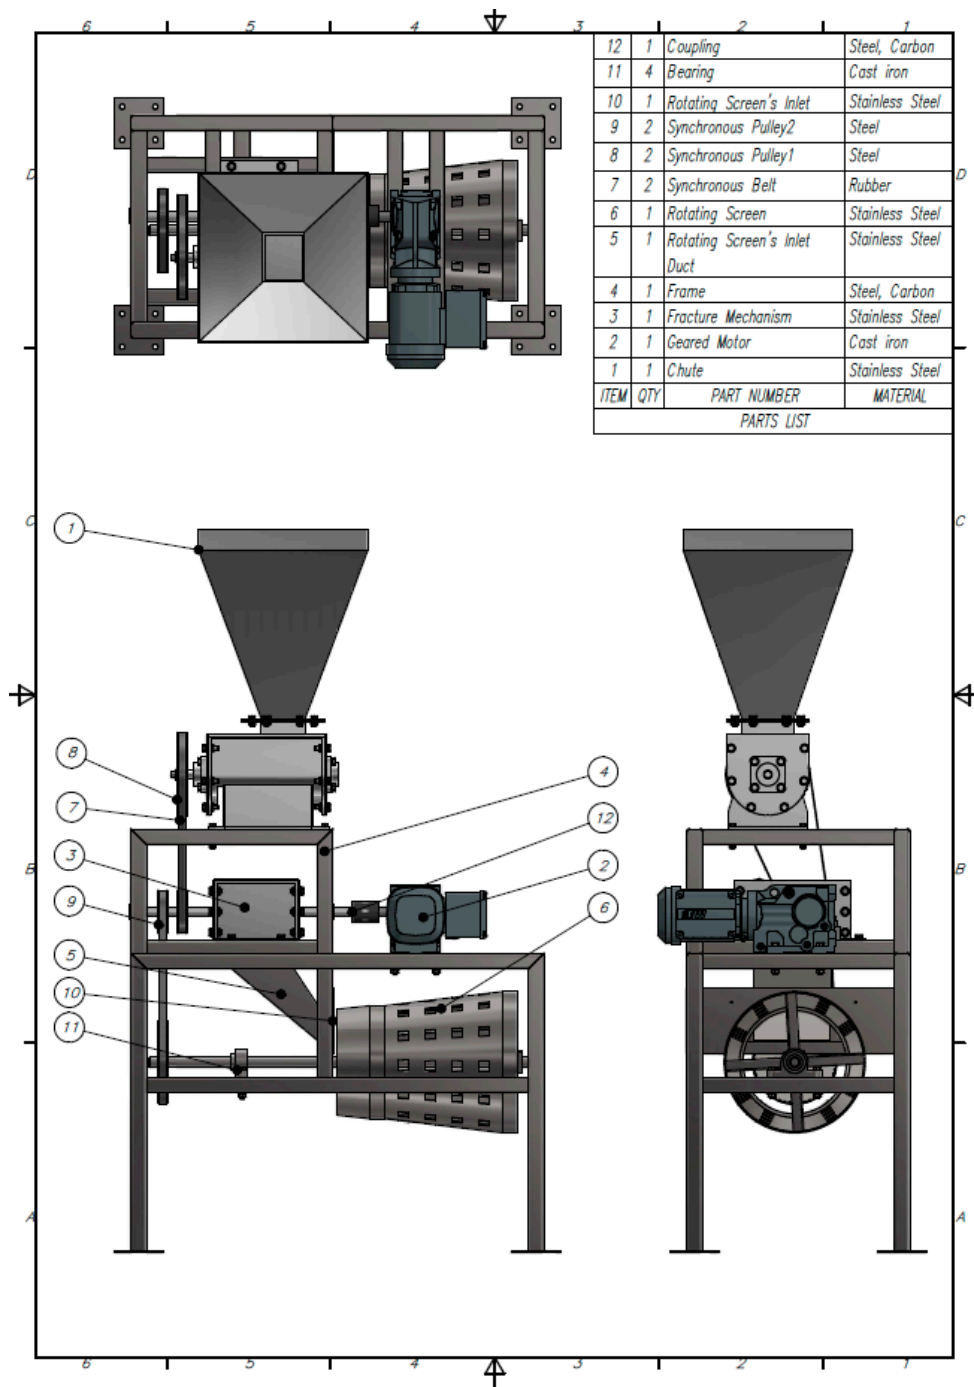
Assembly plan of the shell cracking machine and its elements: main views.
